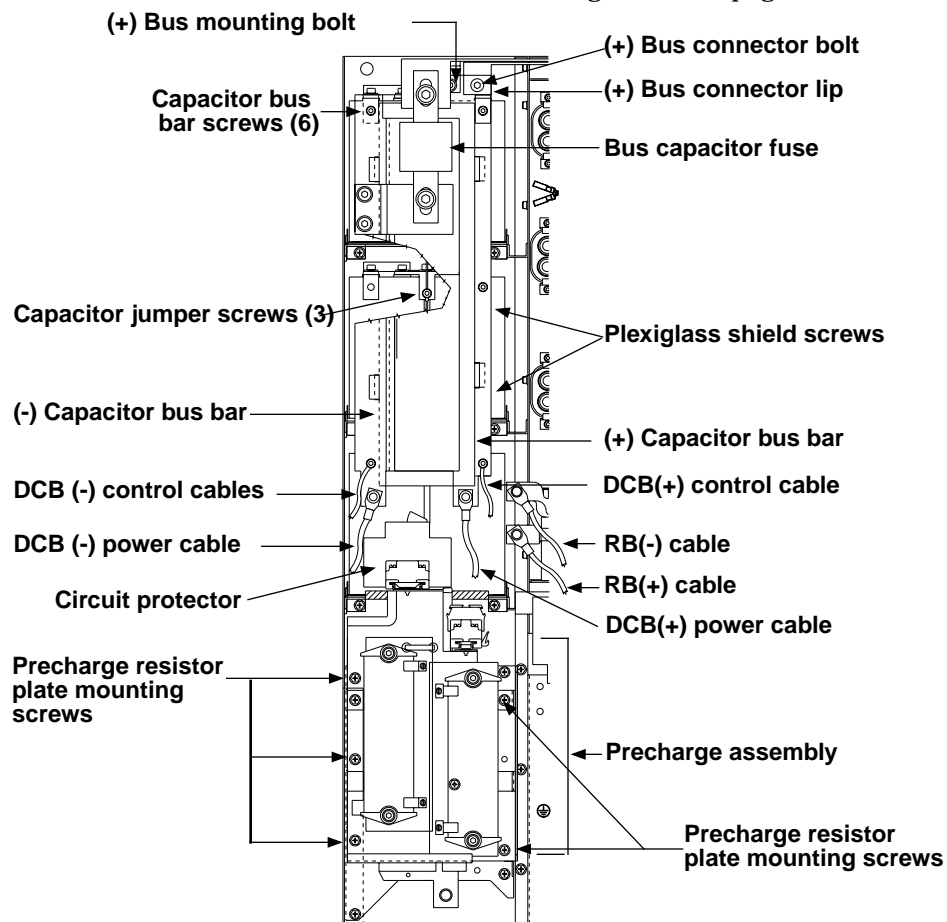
Capacitor Assembly Mounting Diagram—Front View
